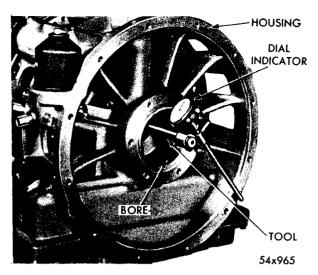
Checking Runout Converter Housing Bore (Tool C-870 and C-430)
